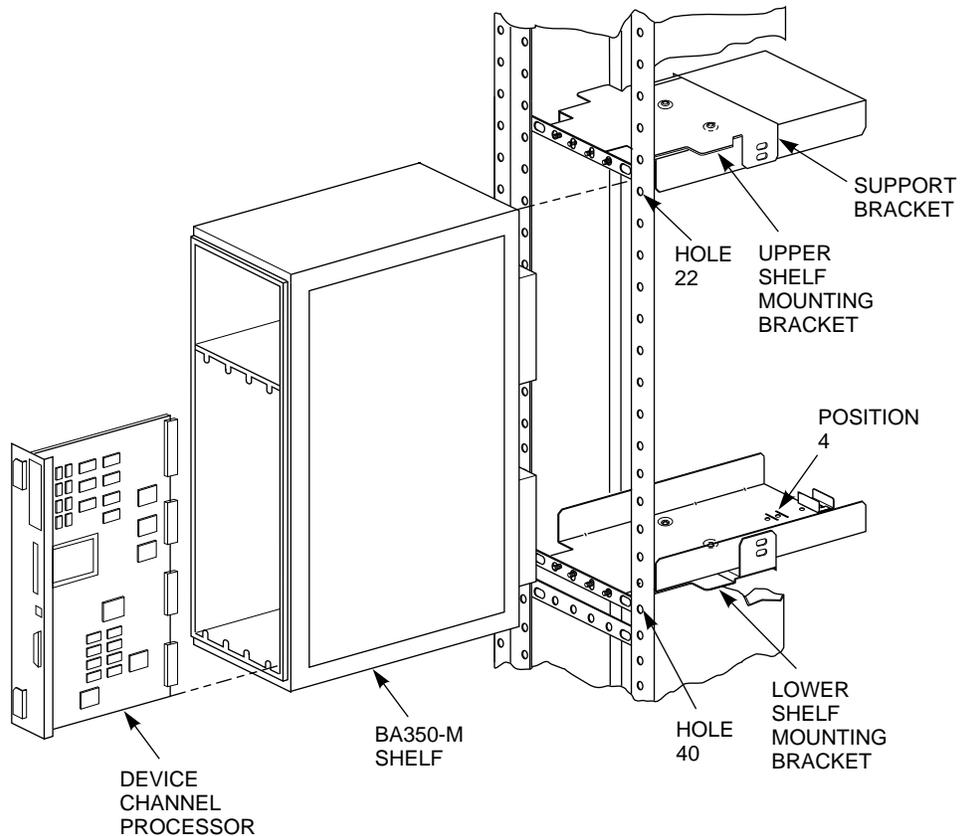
shows an exploded view of the components of the BA350–M shelf assembly:
